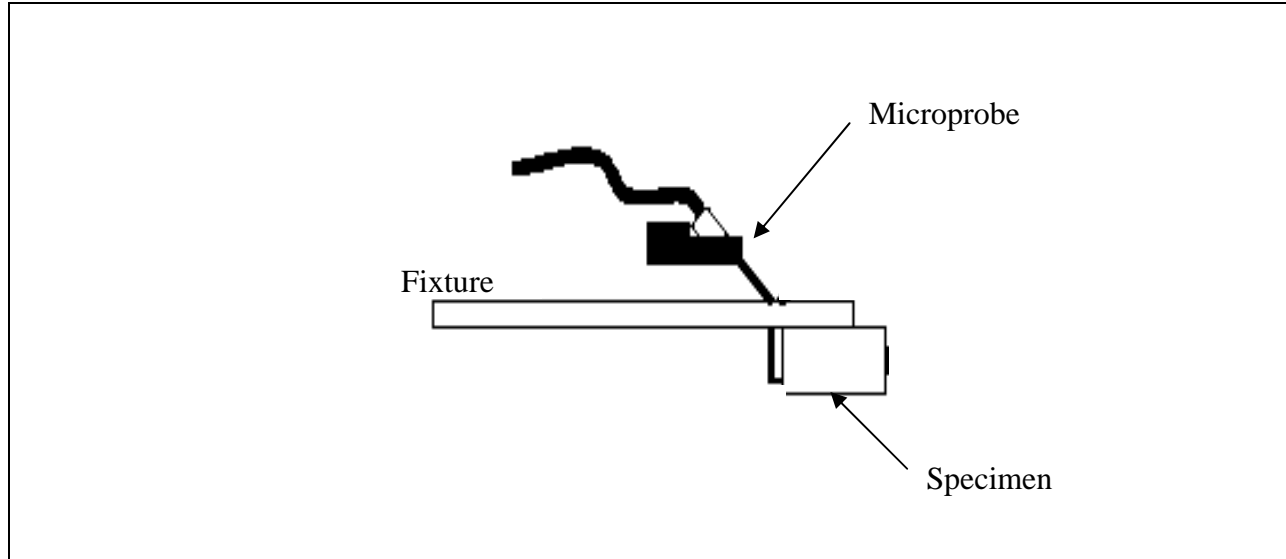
Diagram of microprobes contacting the bottom side of the printed circuit board test fixture
